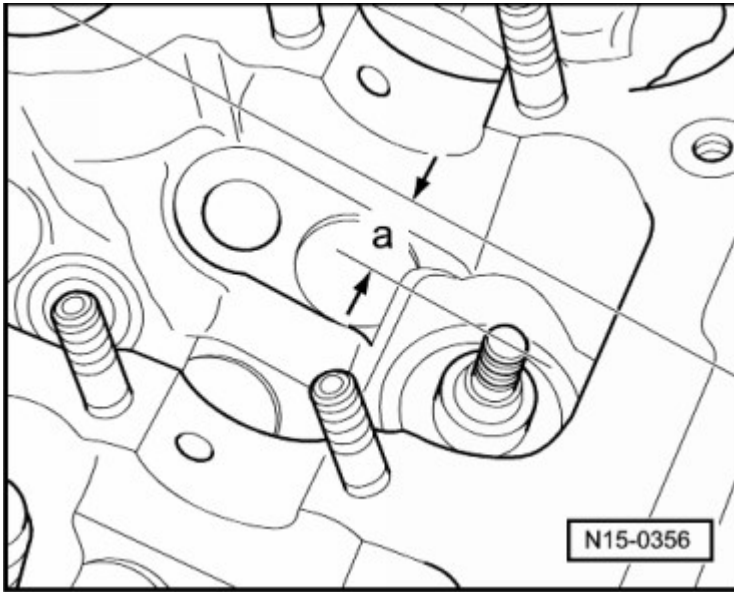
Identifying Distance Between End Of Valve Stem And Upper Edge Of Cylinder Head
